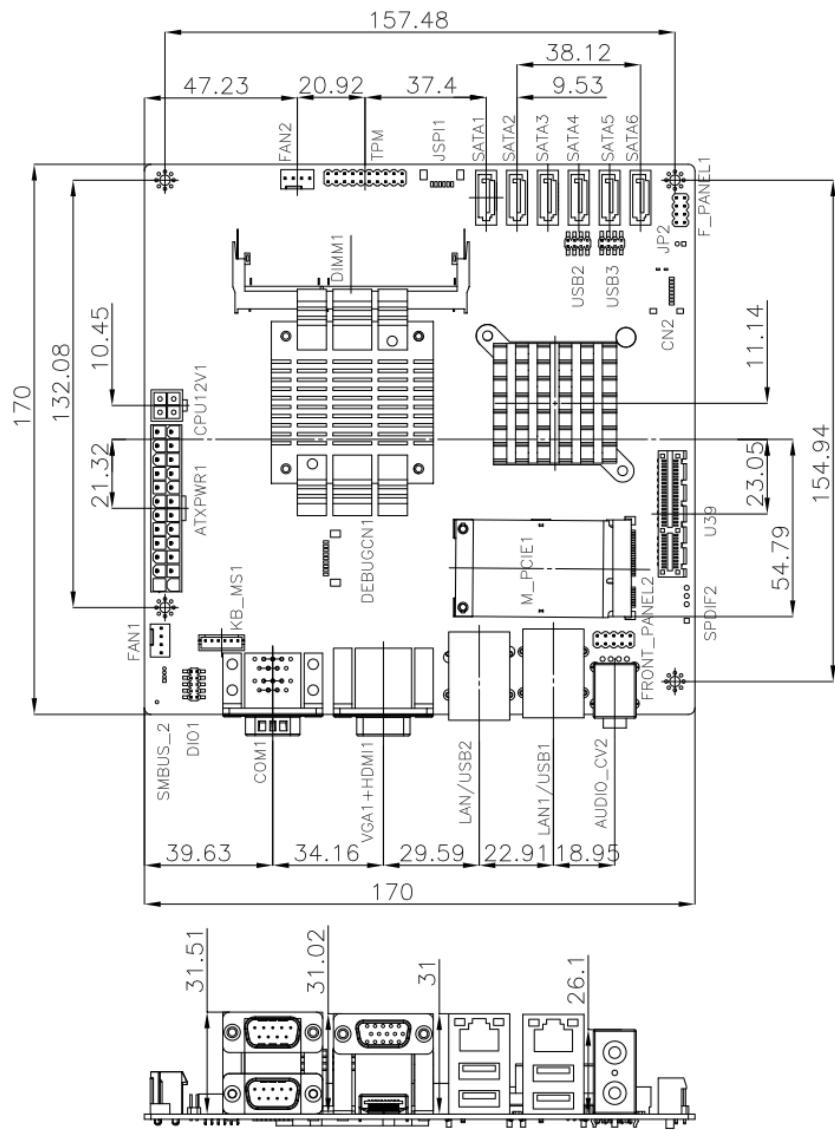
KINO-CVR-D25502/N26002 Dimensions (mm)
